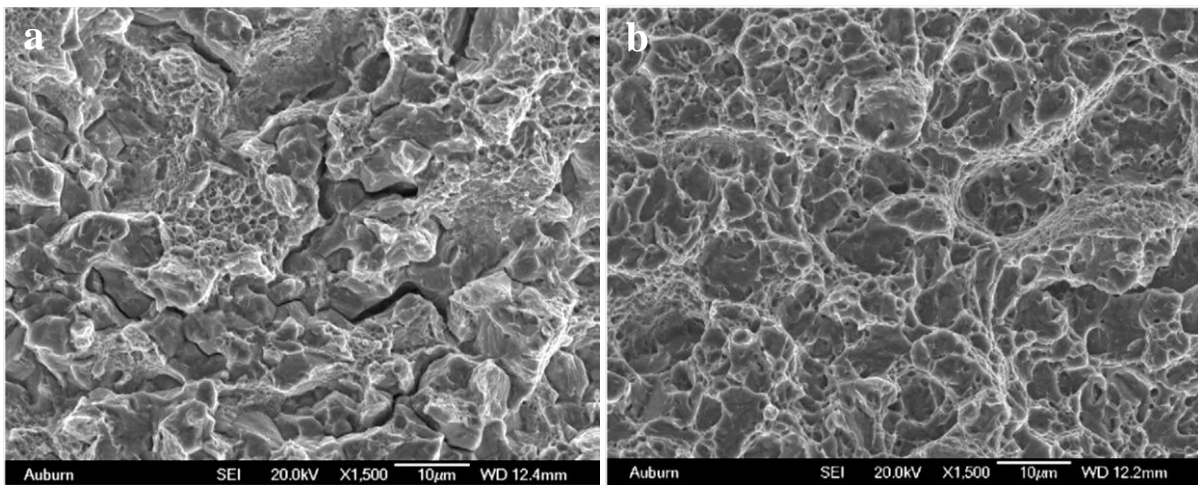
Fracture surface of an embrittled sample exposed to 1600ppm H₂O₂ and condensed liquid (approximately 64 wt.% H₂O₂) for 4.8 h. (a) Fracture surface near the notch root exhibiting extensive intergranular fracture at the prior austenitic grain boundaries. (b) Fracture surface approximately 5mm away from the notch root exhibiting ductile failure by microvoid coalescence.
